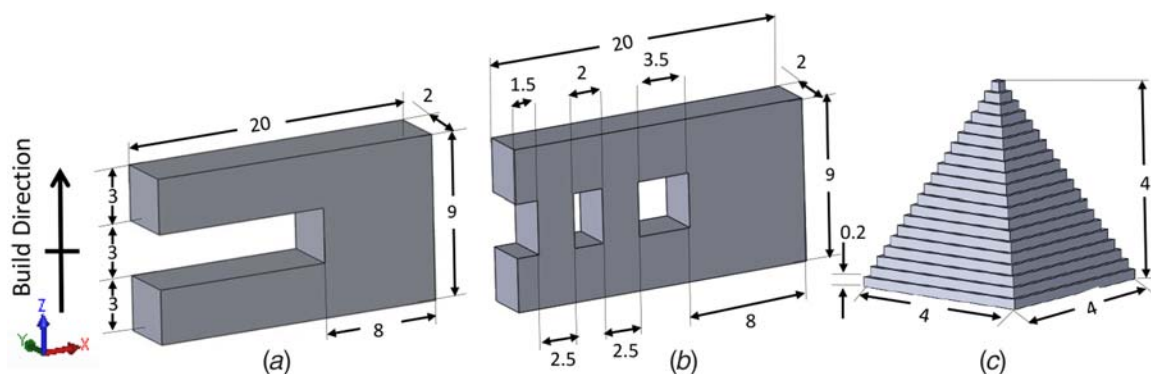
(a) C-shaped, (b) C-shaped with support, and (c) pyramid dimensions in millimeters
